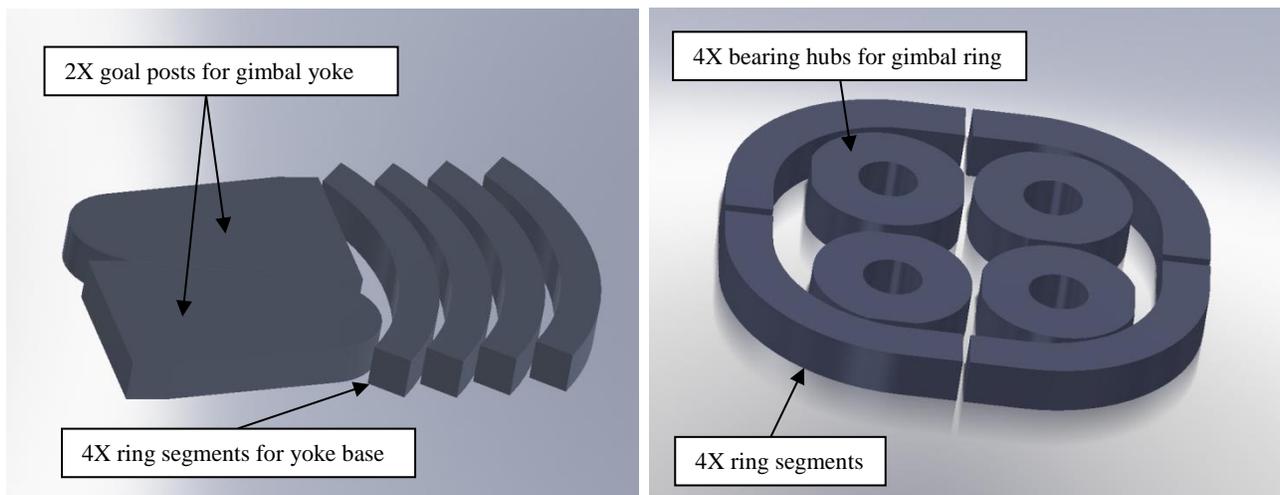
The gimbal yoke (left) and gimbal ring (right) can be efficiently manufactured from blocks of beryllium or aluminum-beryllium material by slicing out the parts, including skin pieces and interior pockets by wire EDM, then brazing or welding all of the parts back together. Individual parts can also be cast or near net shaped prior to final machining and brazing or welding.
